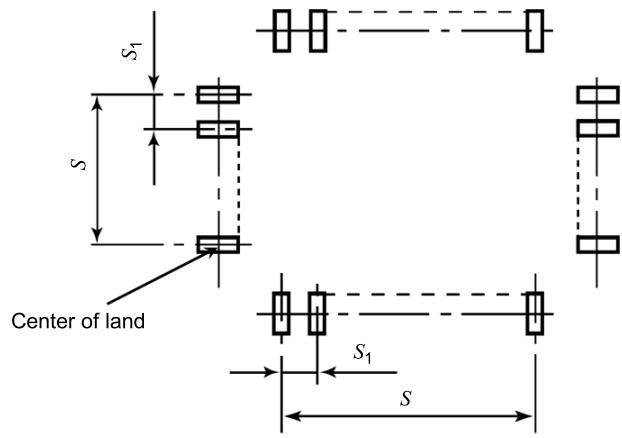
Shift of the center of printed contacts on front and back sides of a board
